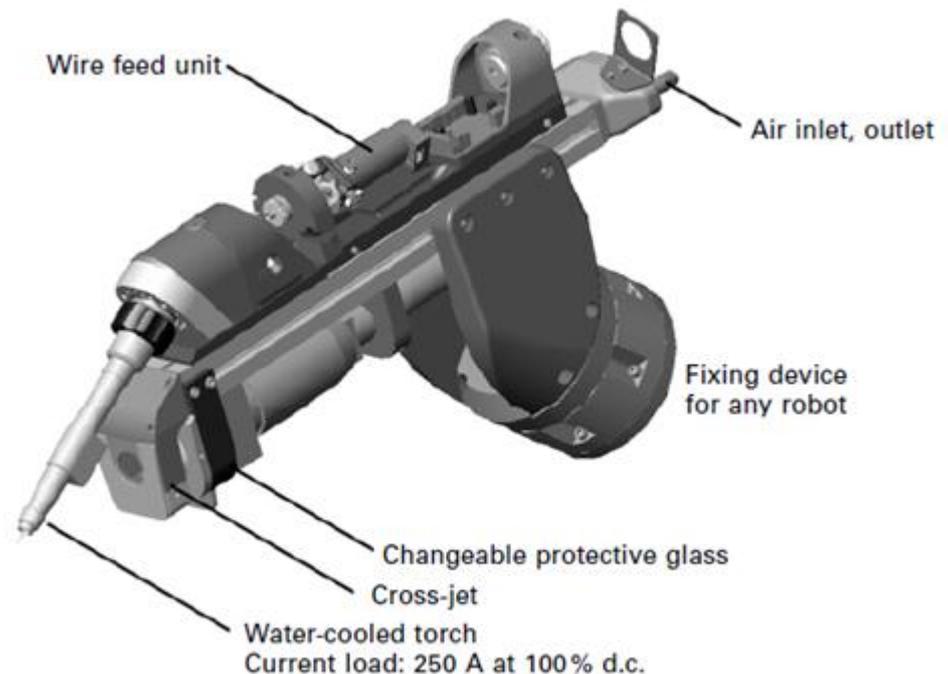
Schematic representation of a laser- MIG/MAG hybrid welding head [45].
